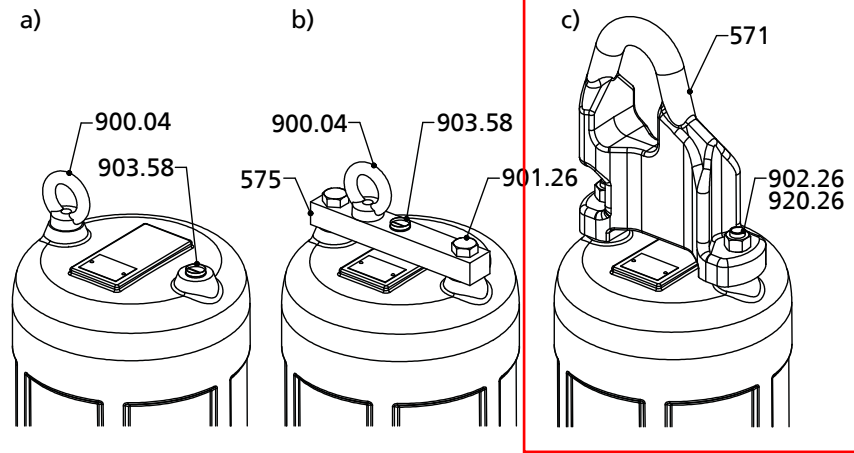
Attachment elements a) bolt for guide cable arrangement b) bolt for guide rail arrangement c) bail
